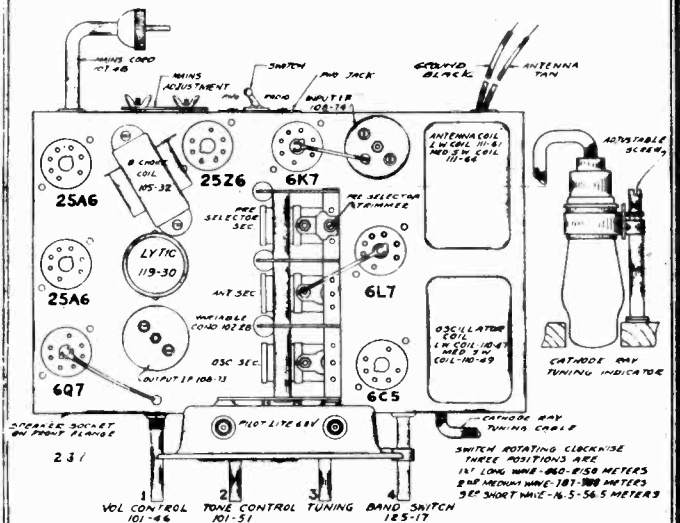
BOTTOM VIEW (Showing Trimmers)
